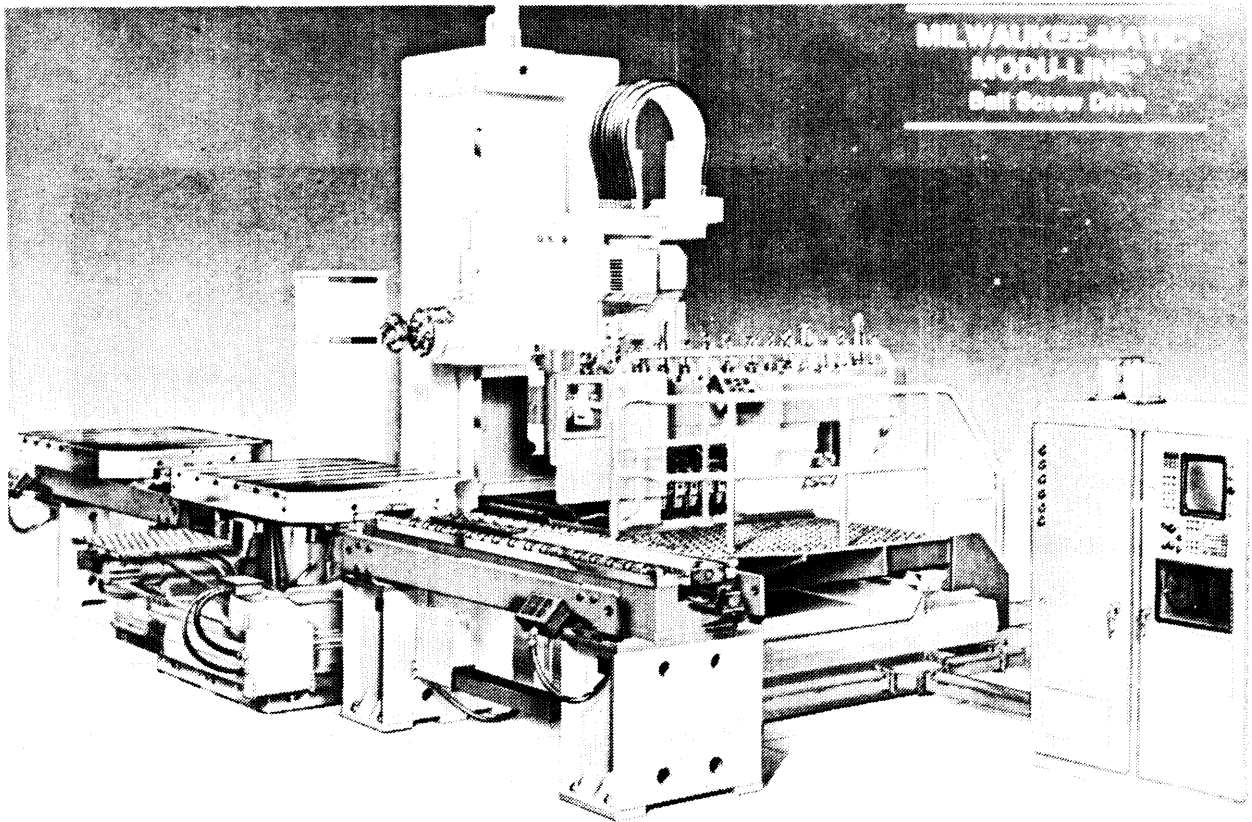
Five-axis machining center, five axes numerically controlled. (Kearney & Trecker)
